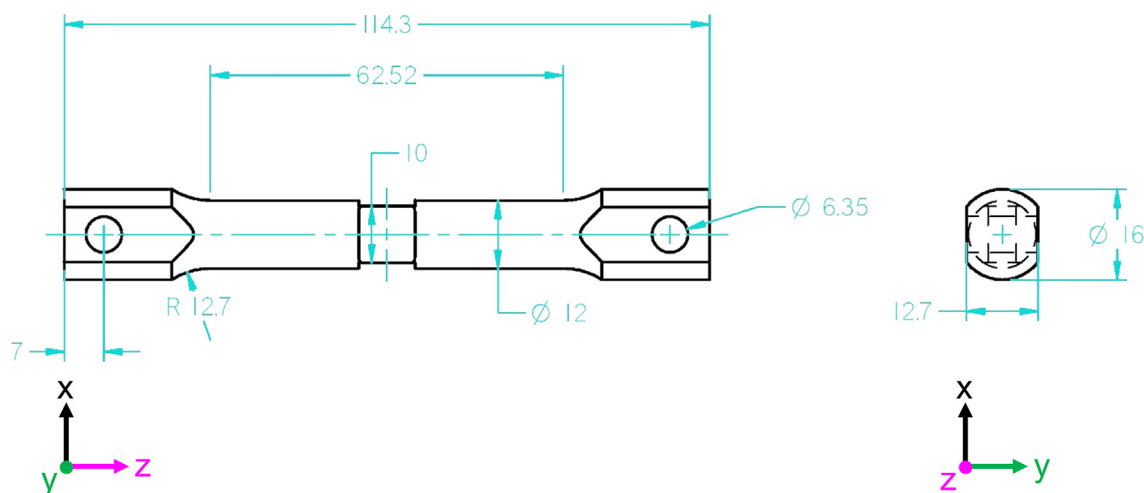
The geometry of the specimen with dimensions in mm, where the gauge section is 10 mm \times 5 mm.
